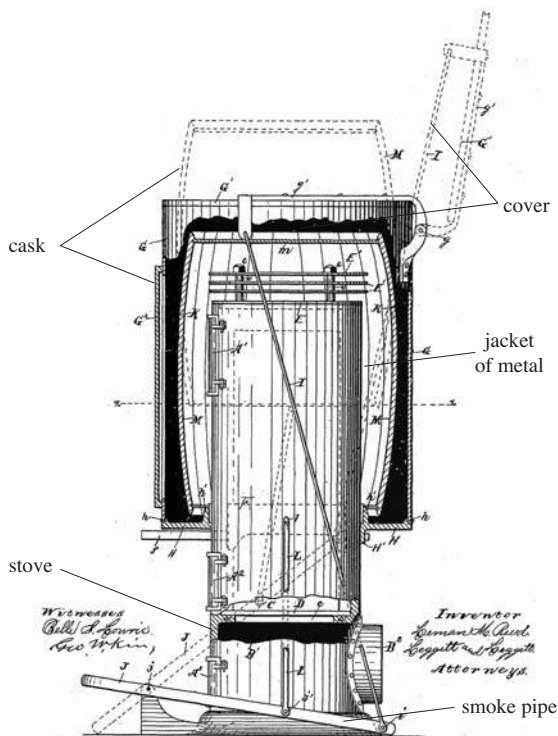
Side elevation, partly in section, of a heater for casks, (Reed, 1890).
